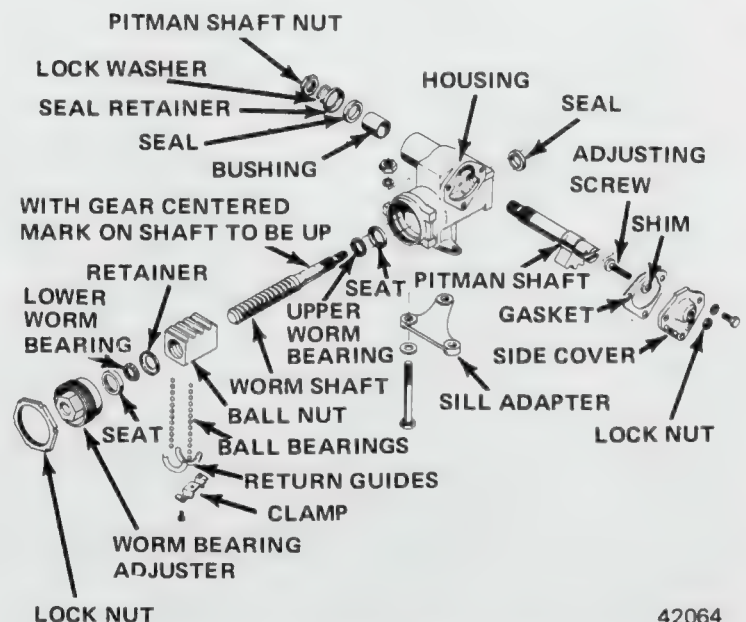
J-1 Manual Steering Gear—Gremlin-Concord-AMX
